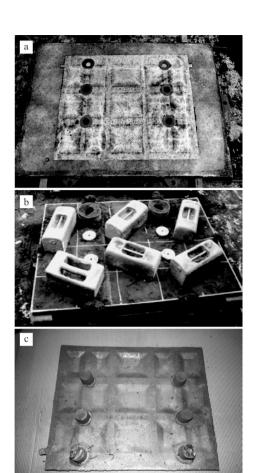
Variant 3 – lower half mold during casting of hearth plate shown in Figure 1 (a), assembled mold ready for pouring (b), and raw casting (c) [4]
